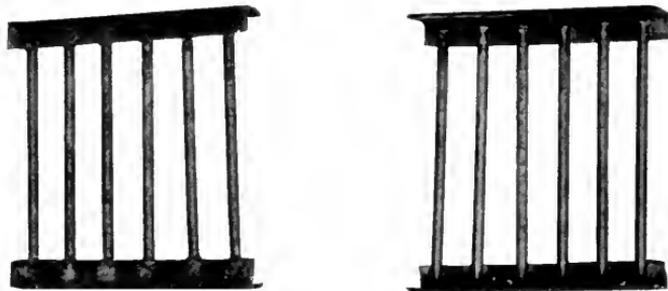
Front and Back Views of Grating Constructed on Spot Welding Machine
